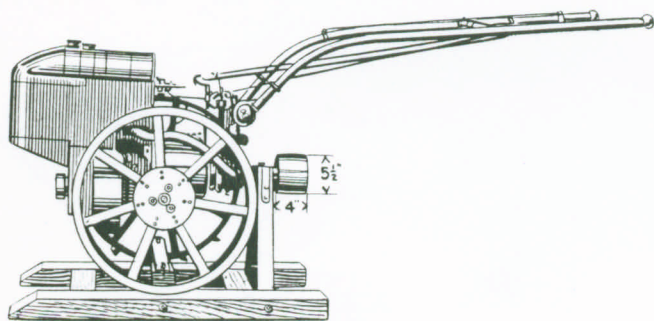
DIAGRAM SHOWING SIMAR ROTOTILLER 5 FITTED WITH PULLEY ATTACHMENTS READY FOR BELT WORK.
